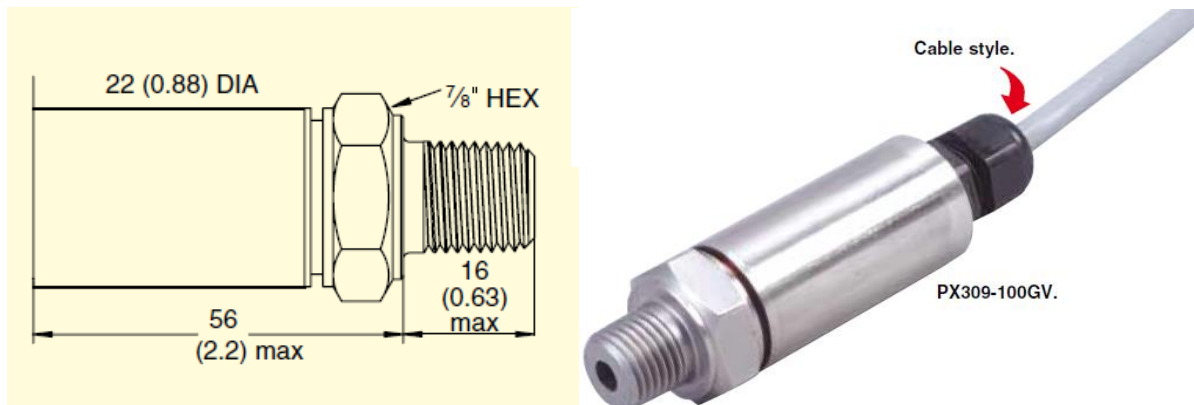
Pressure transducer; dimensions in mm (inch) (manufacturing sheet Omega)
